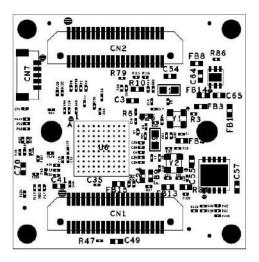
NileCAM20_CUNX Camera Module Board Rear View
